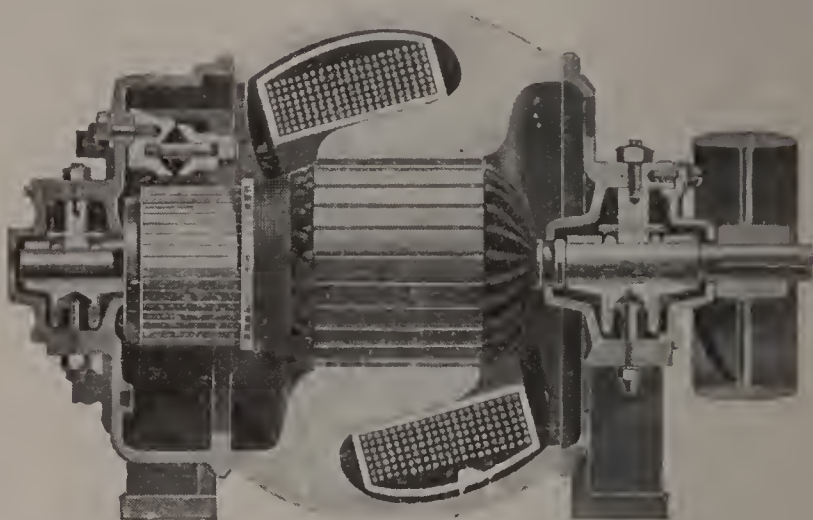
SPRAGUE ROUND TYPE MOTOR, SECTIONAL VIEW
